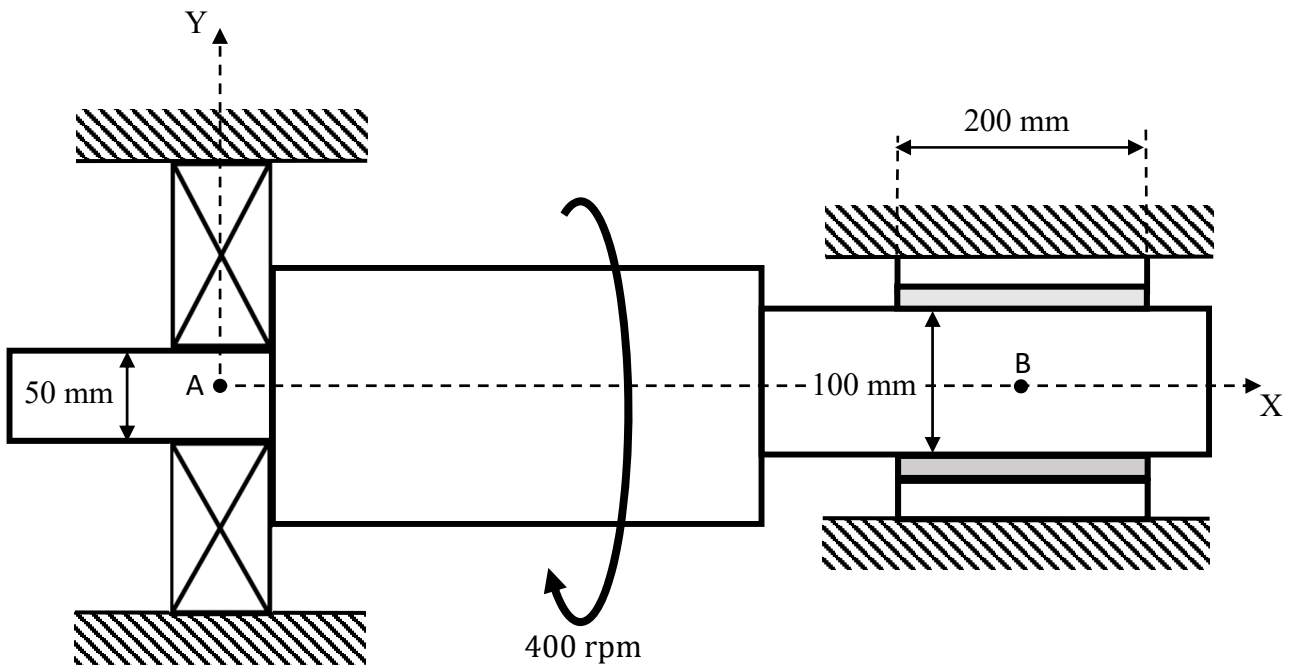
Shaft supported by a ball bearing at A and a journal bearing at B. (Not drawn to scale).
